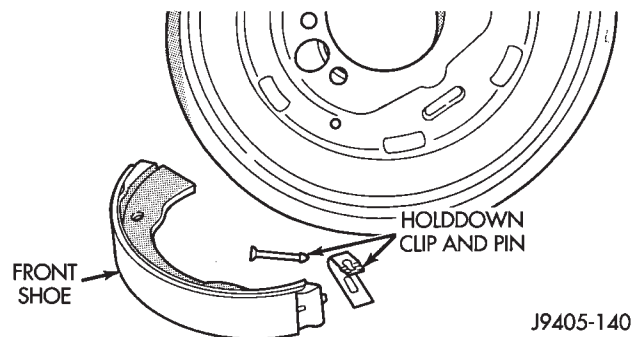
Front Brakeshoe And Holddown Clip And Pin Removal
